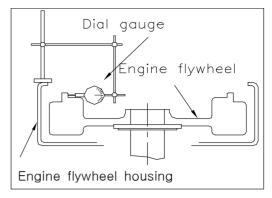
FLYWHEEL FLATNESS CHECKING
